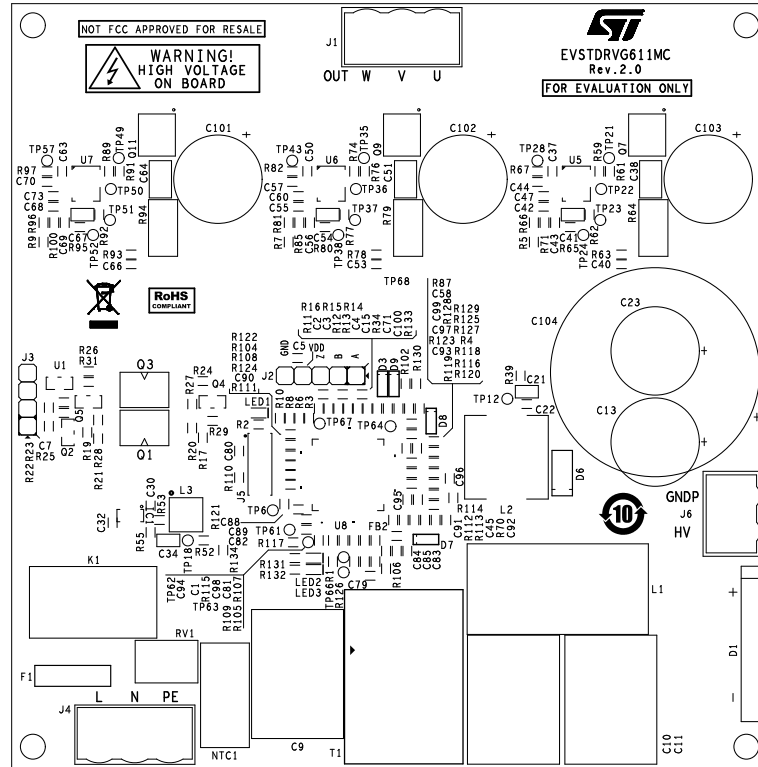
EVSTDRVG611MC layout - component placement bottom view
